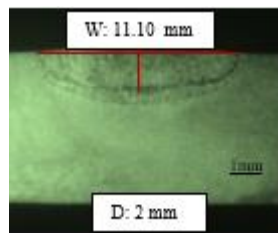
TIG weld bead geometry (D/W ratio: 0.18)
